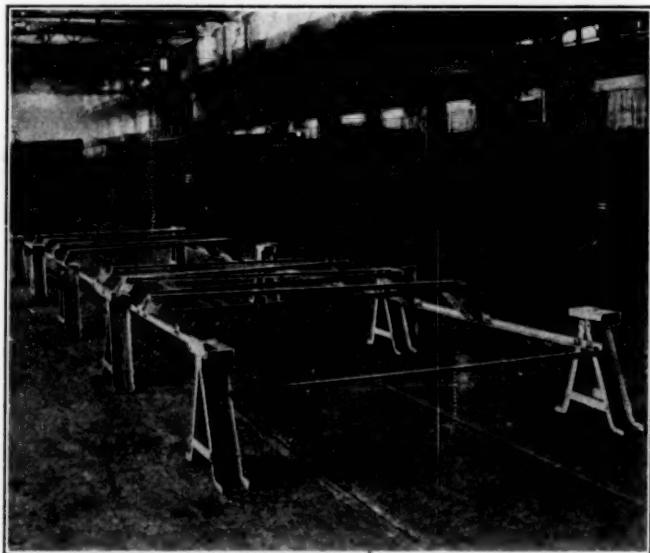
JIG USED IN ASSEMBLING SIDE FRAMES
